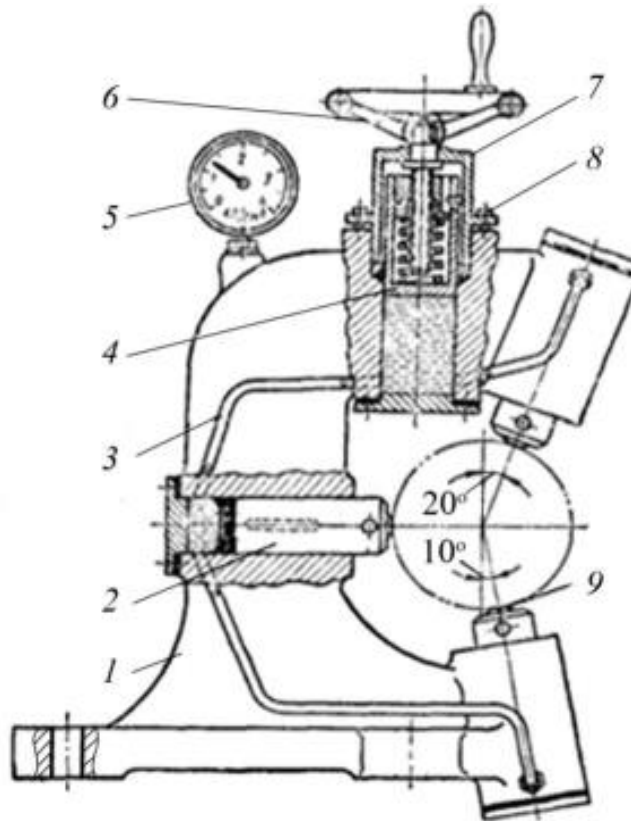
Lunette-vibration damper: 1 - housing; 2 - pistons; 3 - pipes; 4 - loading piston; 5 - manometer; 6 - handles; 7 - covers; 8 - bolts; 9 - rollers.
